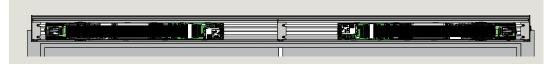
115 Vac power cable installed on operator with 115 VAC customer connection
